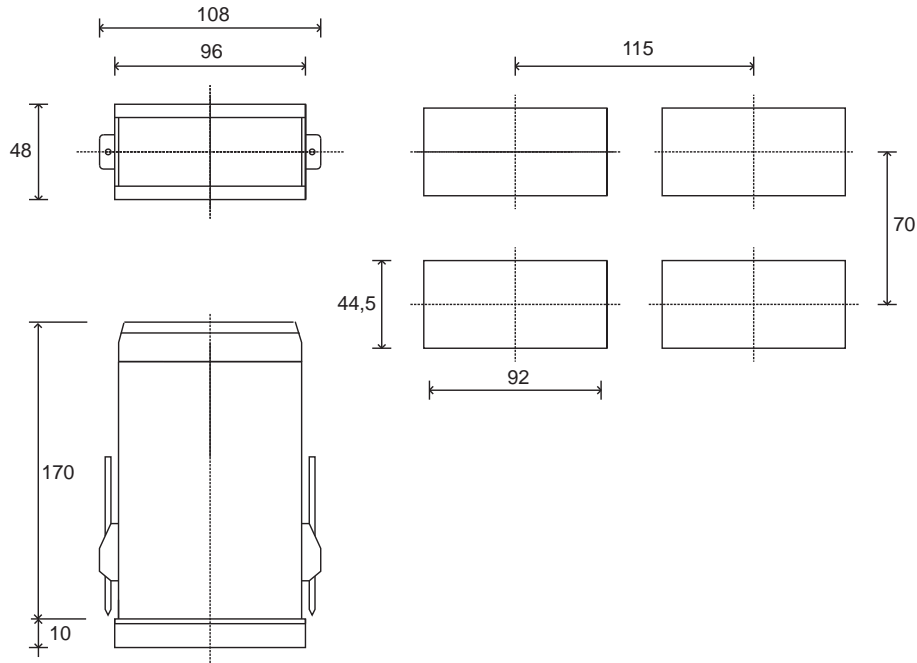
Installation dimensions of the 9163 digital indicator (dimensions in millimeter)
